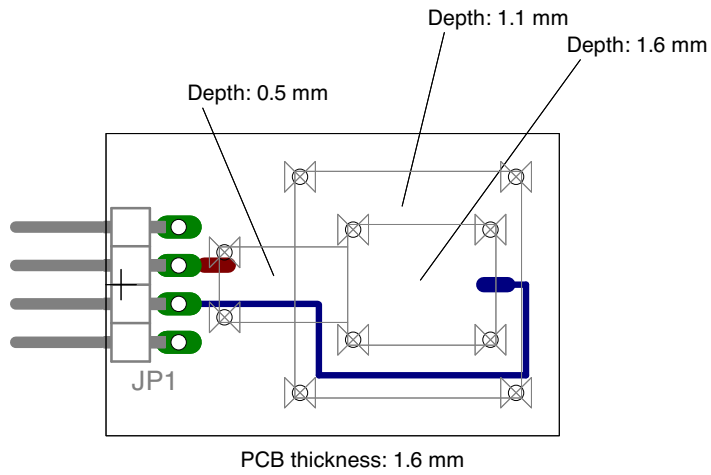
Design of the PCB holding the simplified sensor (see Section 6.1). Scale 2:1.
